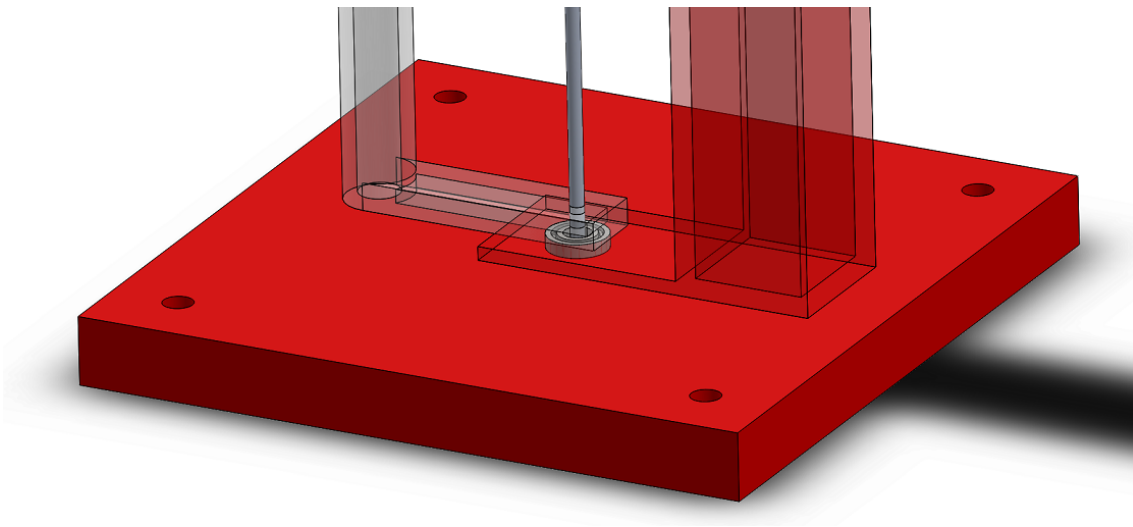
Lower Bearing Detail (Painted and Transparent)
